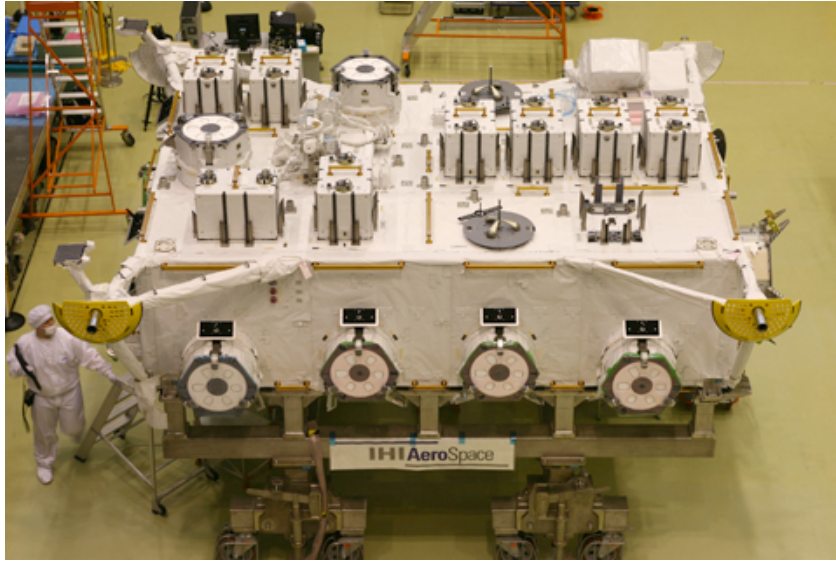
Kibo's Exposed Facility Under Construction [6]
